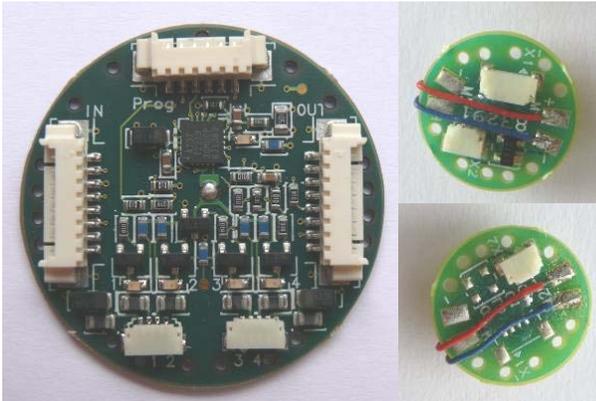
photographs of driver PCB (left), motor PCB 2 with relay connector (upper right) and motor PCB 1 (lower right). Motors (not shown) are placed on the rear.
